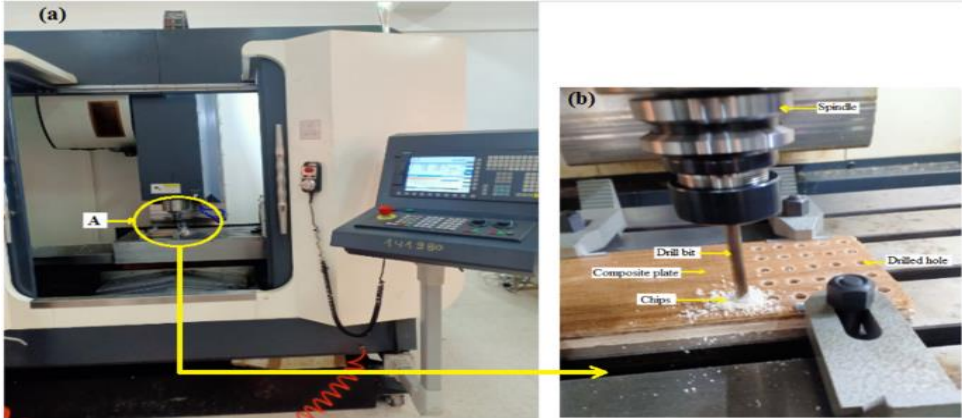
Drilling experiment set up (a) fixed on vice in the CNC Machine (b) drilling number of holes based on parameters
